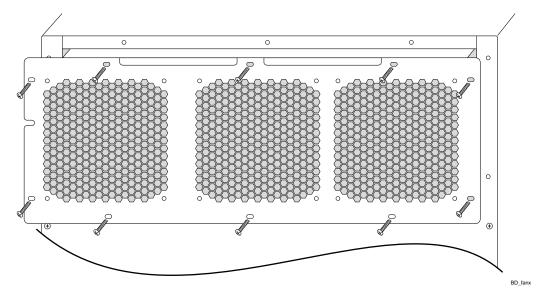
Removing the BlackDiamond 6808 fan tray
